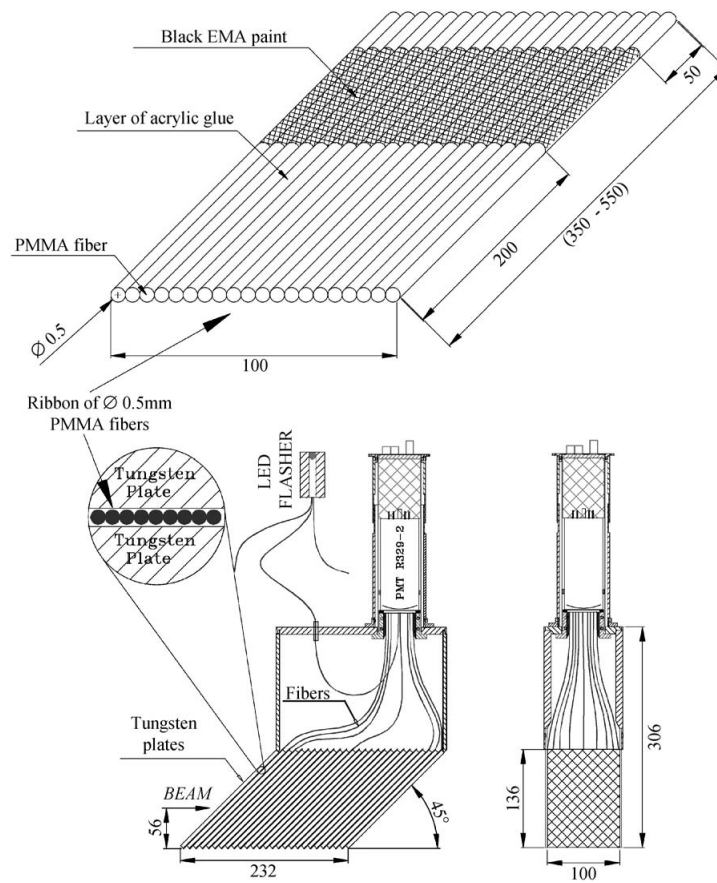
Mechanical design of the ZDC tungsten modules [167, 168]. Dimensions are shown by mm.
